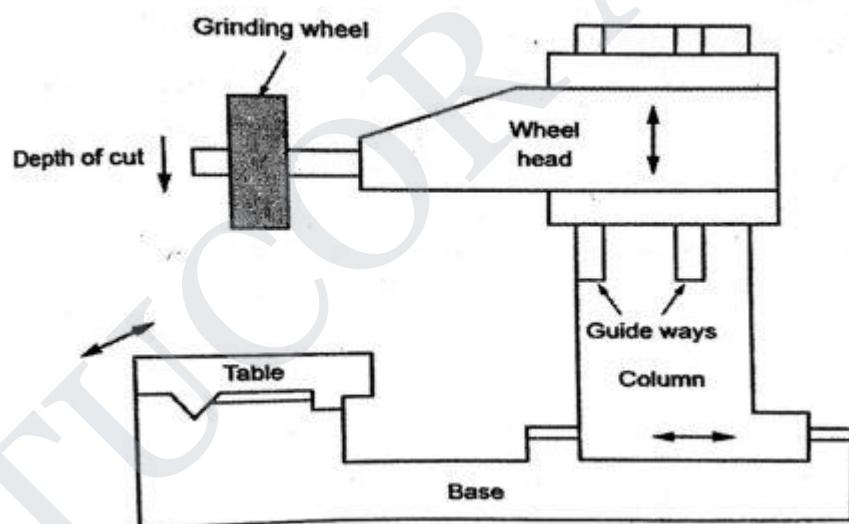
Horizontal spindle reciprocating table surface grinder
